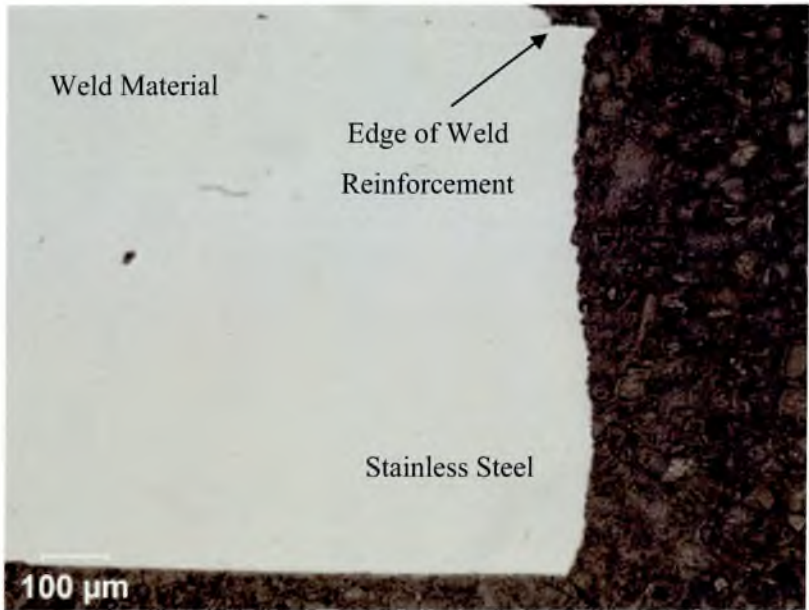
Photo showing fatigue failure for a LHW butt joint of dissimilar thickness, the failures occurs on the thinner stainless steel side of the joint.
